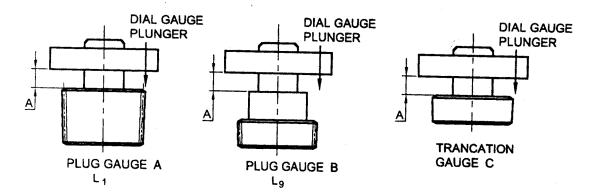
Gauging Set-up to Check External Taper Threads on Valve Stem
